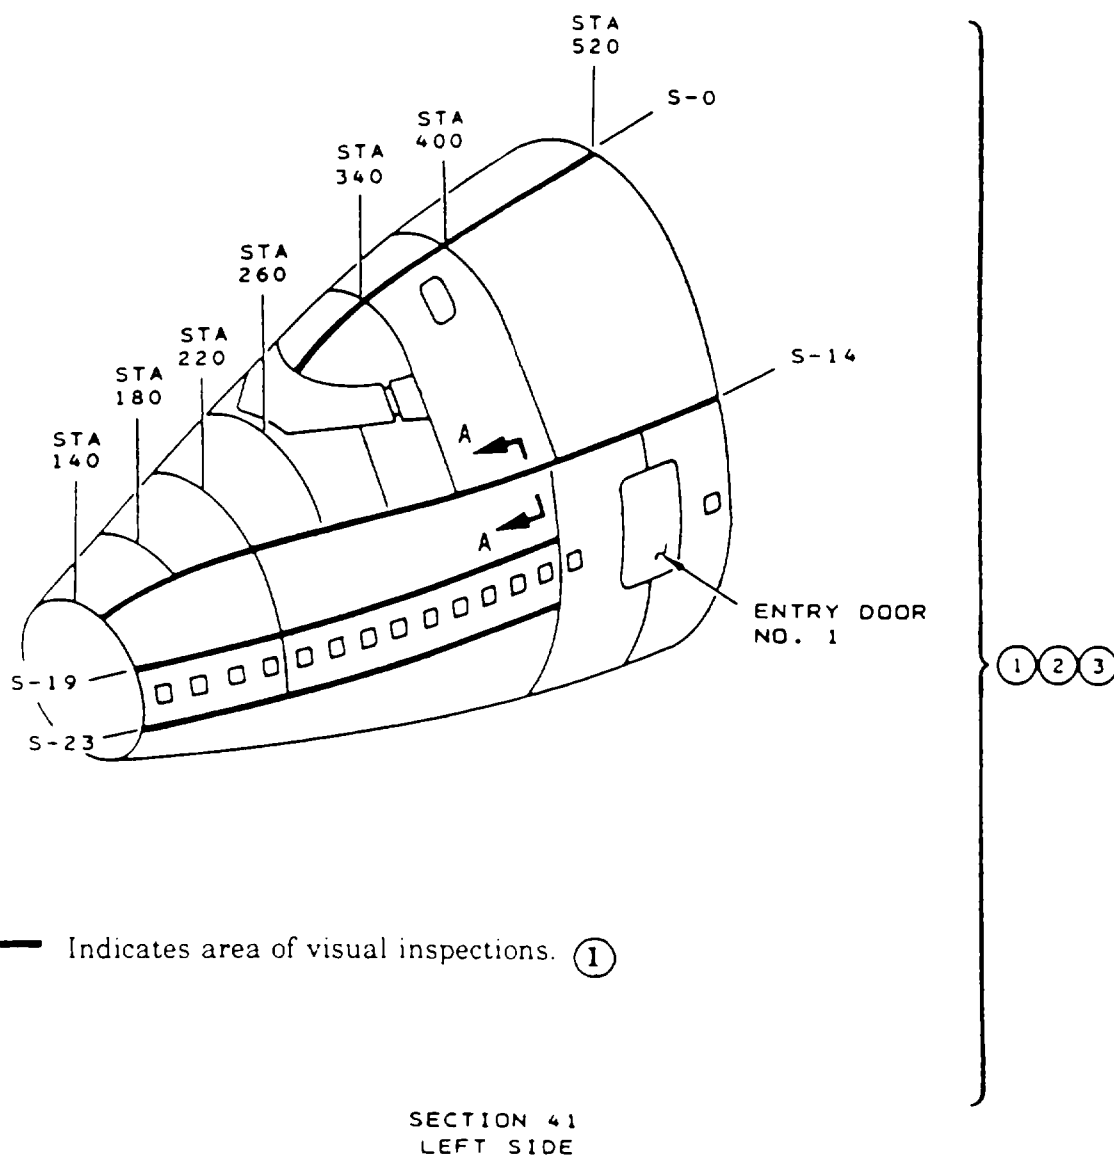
EXTERNAL LAP JOINT CORROSION INSPECTION
